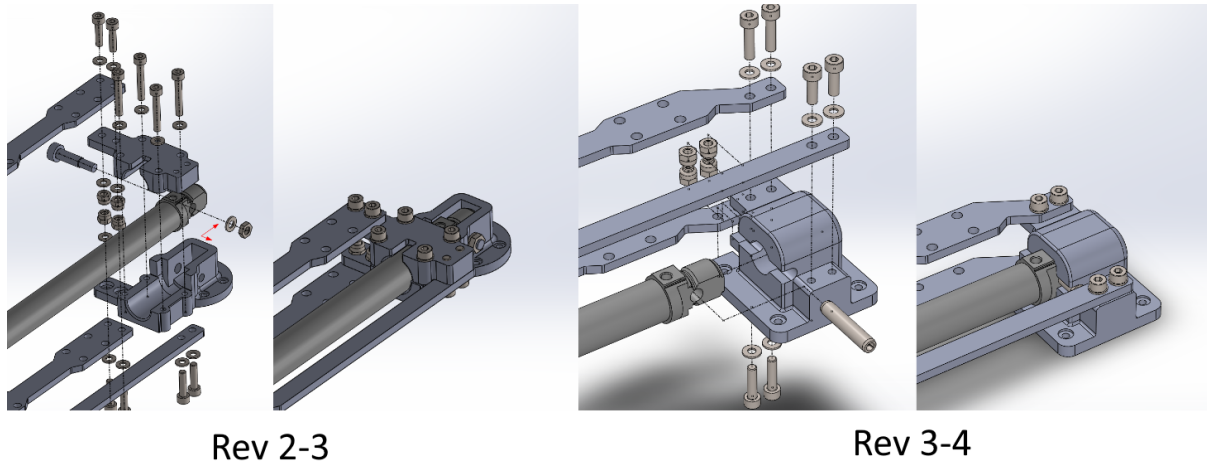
Cylinder mount Revision 2-3 exploded and assembled views (Left) and Cylinder mount Revision 3-4 exploded and assembled views (Right).
